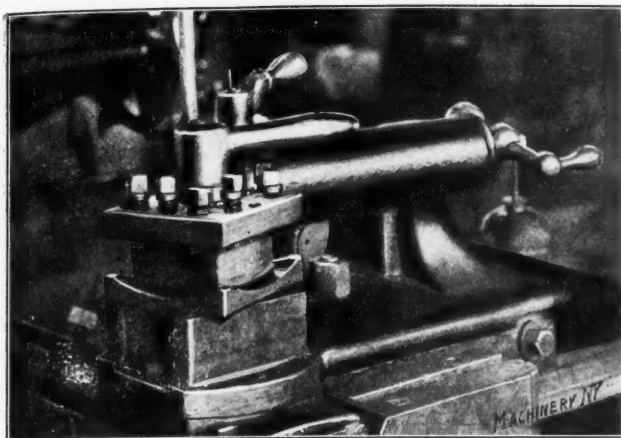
Lathe Turret Tool-post for Holding Four Tools
